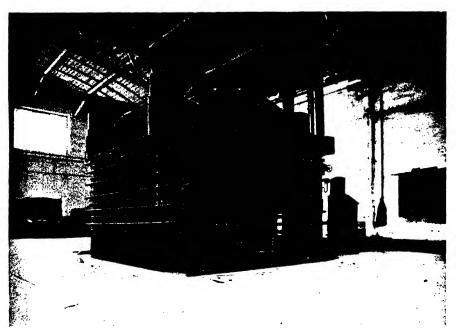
A Large Hot Press capable of producing Boards 137"×89".
